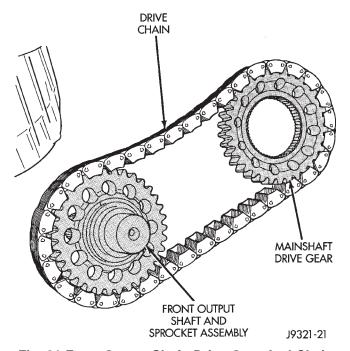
Front Output Shaft, Drive Gear And Chain Removal
